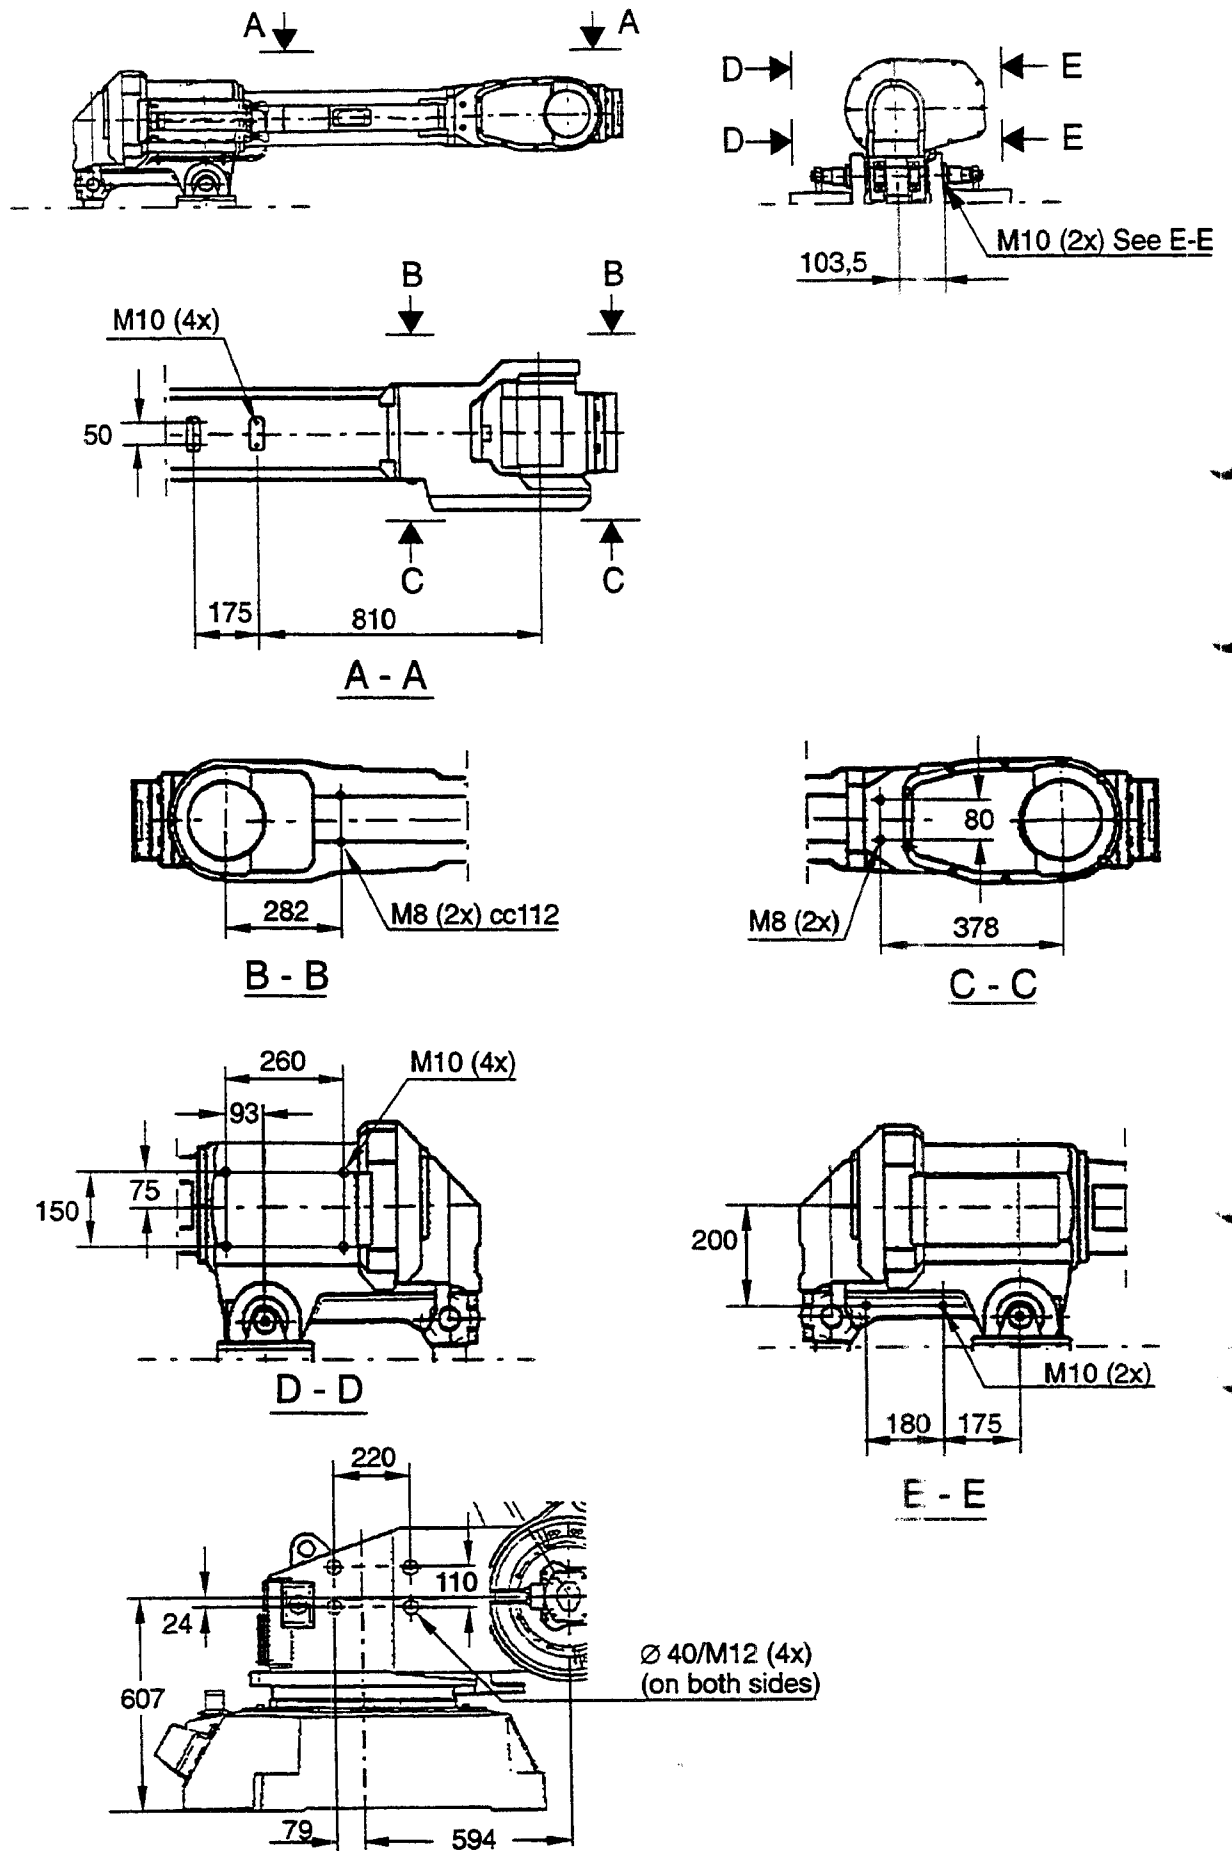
Holes for mounting of extra equipment (Measures in mm).
